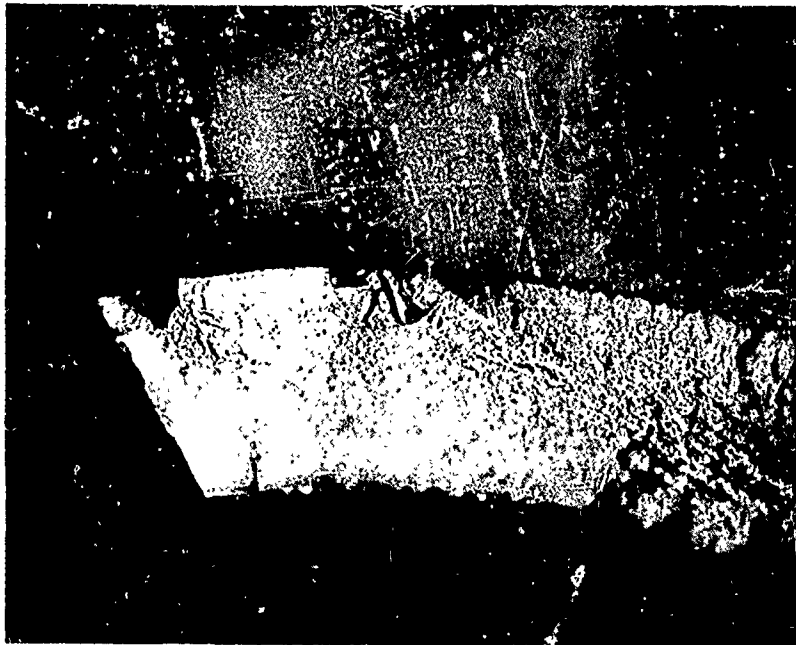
FRACTURE SURFACE 4330V MODIFIED STEEL
